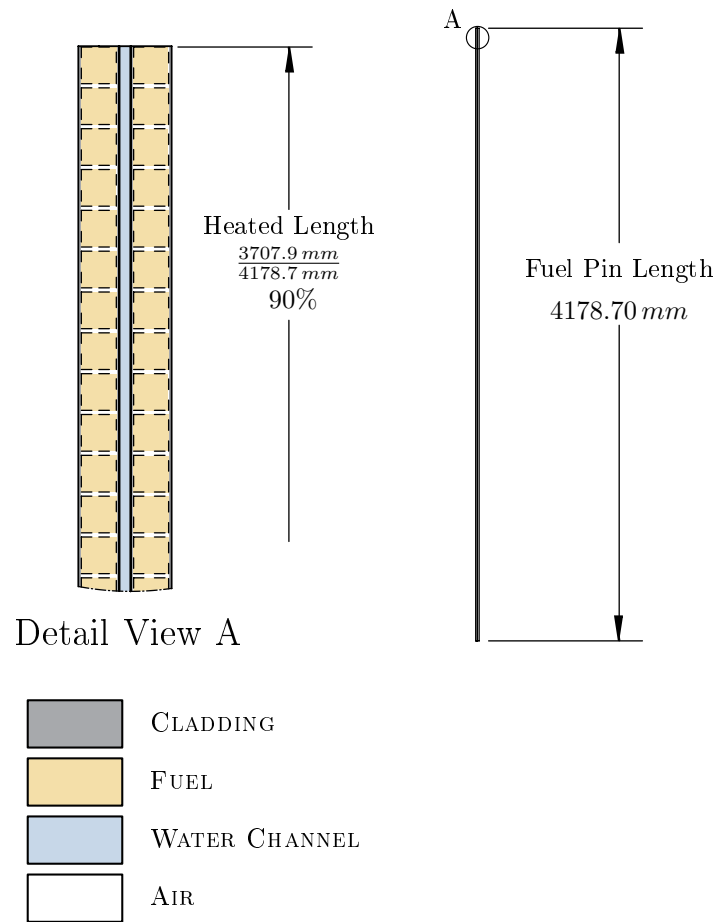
Axial Dimensions and Spacing of 4 Fuel Pins in GE 9x BWR Core
